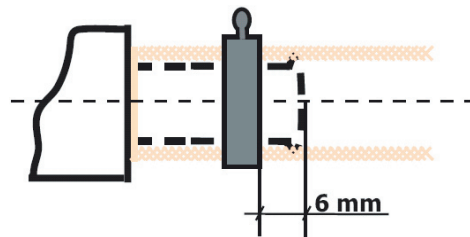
shows the assembly position of the clamp on the plastic connector of the multi-way valve.
